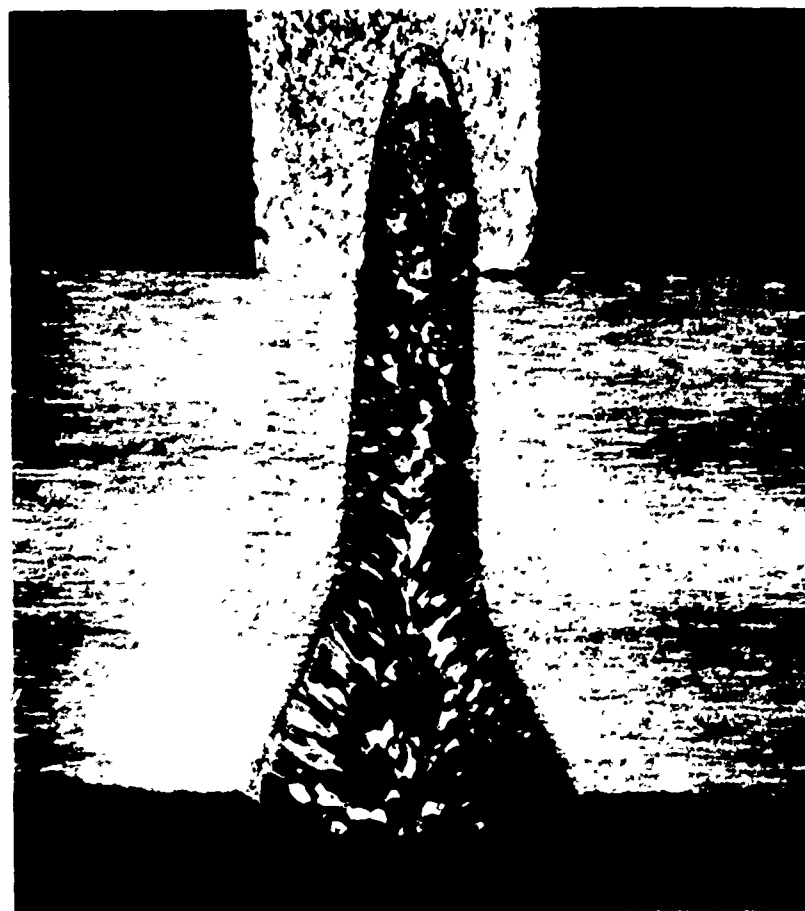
Macrograph of Weld, In Chamber Electron Beam Weld Intrusion (15X)
